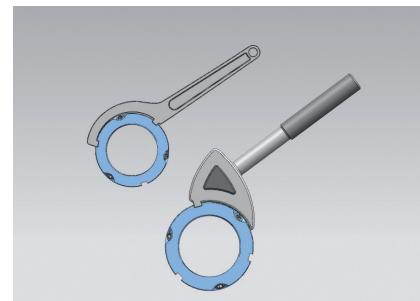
Proper installation of the YCF type lock nut using a wrench
